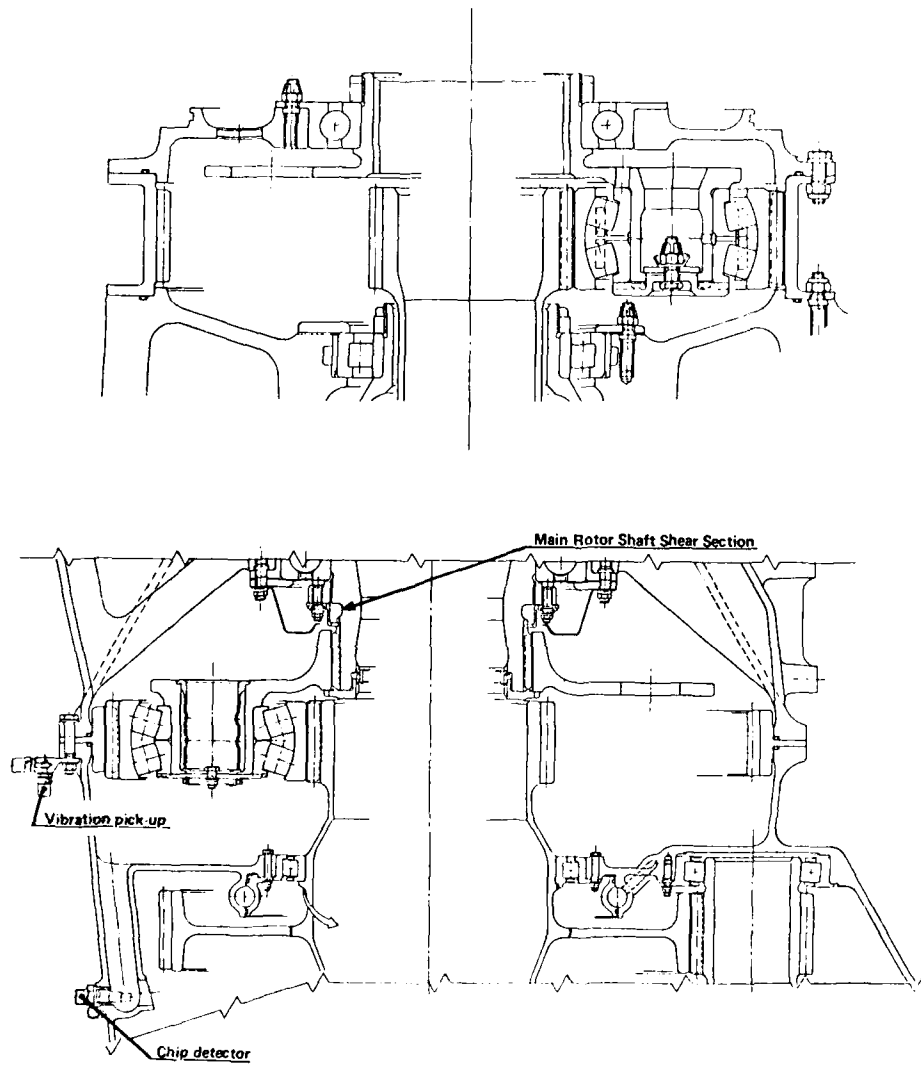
Longitudinal sections of two gearbox gearings. The second is the result of an optimized fail safety design.
